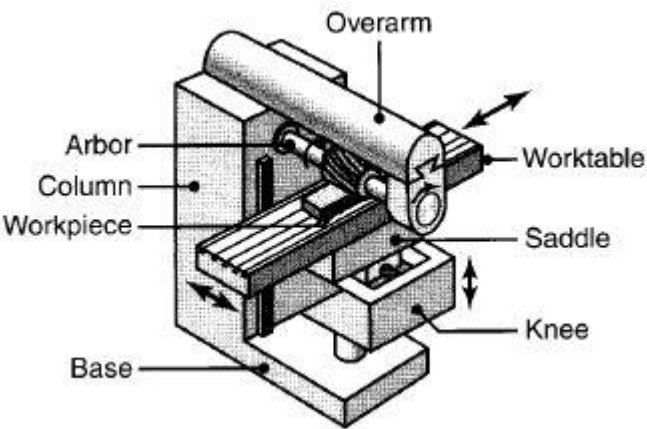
Horizontal-spindle column-and-knee-type milling machine [8]
